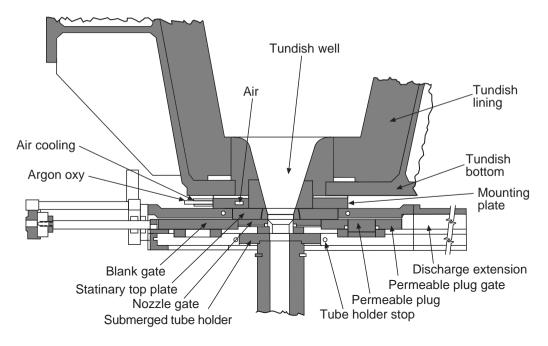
Tundish valve showing submerged pouring tube in position.
